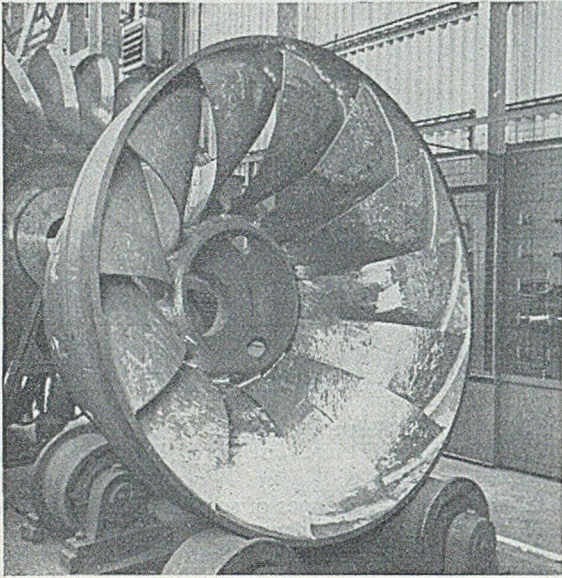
Francis Runner Welded Assembly (another view).
